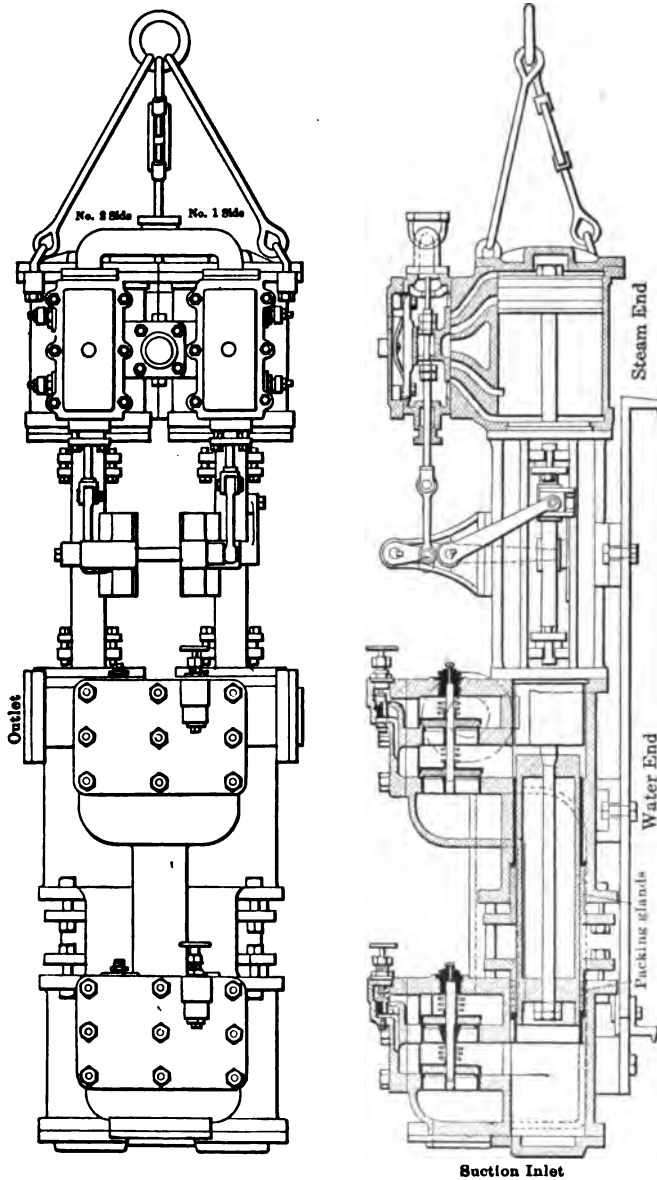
Sinking pump. (Prescott Steam Pump Co.)
